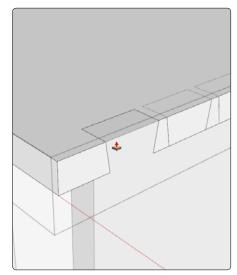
This shows the half-dovetail after clean-up with the Eraser Tool.
